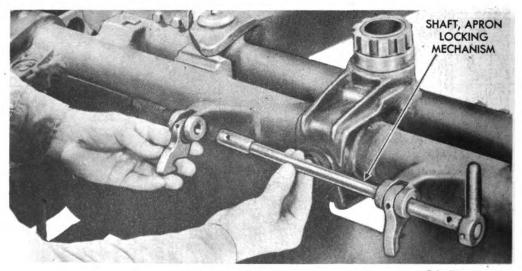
Removing the Apron Locking Hook and Apron Locking Mechanism Shaft
